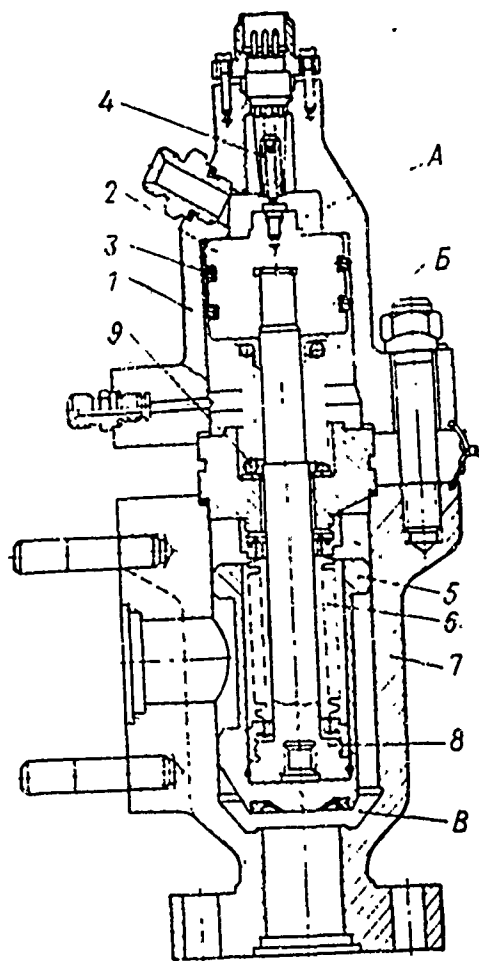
A normally open test bench pneumatic valve: 1 - cover; 2 - piston; 3 - seal ring; 4 - valve travel signal indicator; 5 - valve; 6 - bellows; 7 - housing; 8 - rod; 9 - spring; A - control cavity; 5 - drainage cavity; B - propellant cavity.
